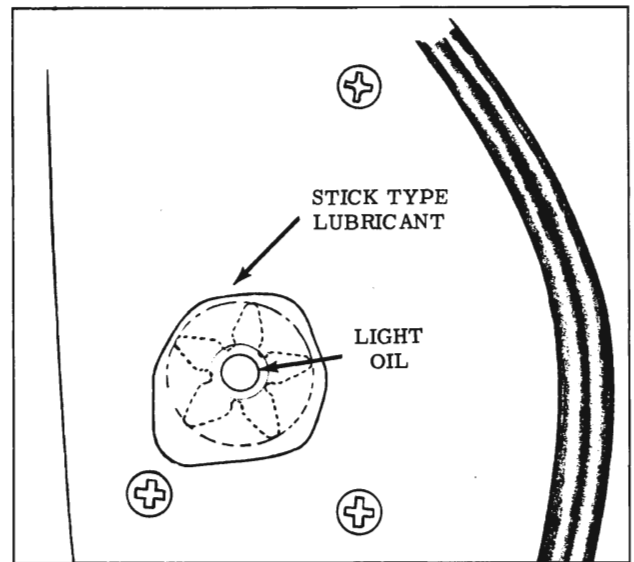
Door Lock Rotary Bolt Lubrication
